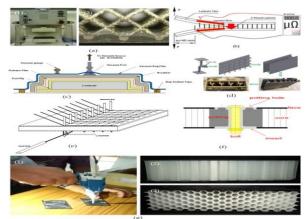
(a) Heated press (1) manufacture setup (2) skin–core bond details of SS316L lattice core and CFRP skins [28], (b) Z-pinning technique [29], (c) Vacuum beg setup [30], (d) J-hooking technique [31], (e) Stitching technique [32], (f) Bolting technique [33], (g) Adhesive technique; (1) Adhesive gun; (2) Sandwich construction in out-of-plane; and (3) In-plane direction [21].
